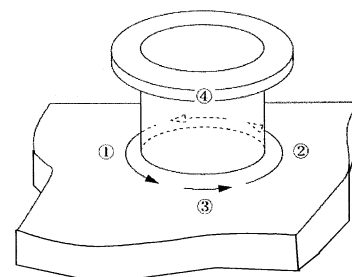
Symmetrical tack welding on strongly restrained thick section work
